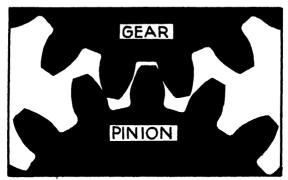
CHECKING MESHING OF GEAR AND PINION
